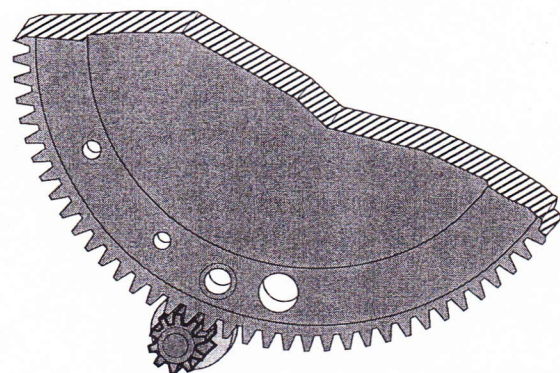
Starter drive pinion gear is used to turn the engine's flywheel.
